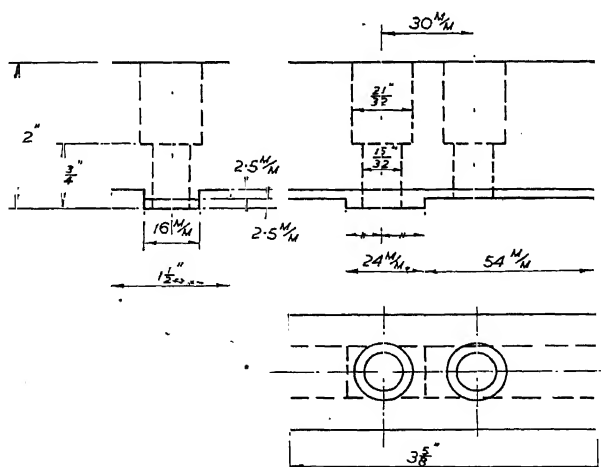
Soft jaw blanks for Harles 3-jaw chuck (with replaceable jaws). 9 in.
